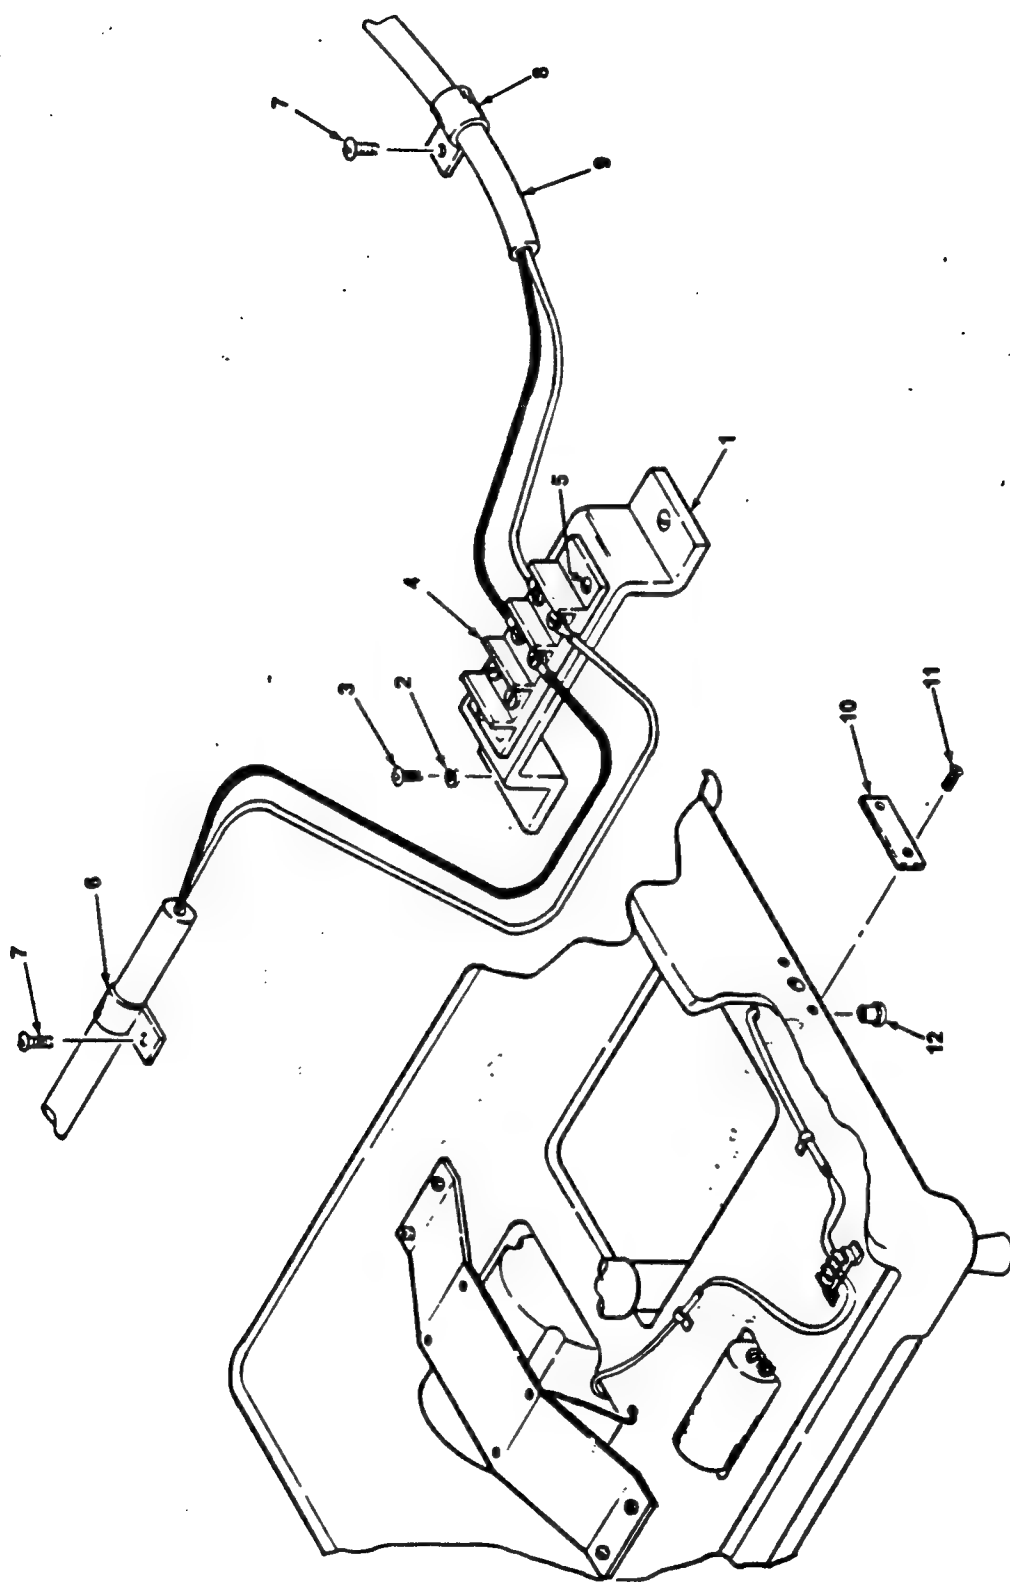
2080 COMPAT BASE ELECTRIC COMPONENTS ASSEMBLY.
